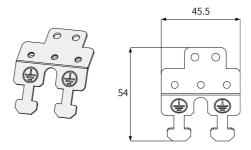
Dimensions of EMC shielding bracket for the drive unit
